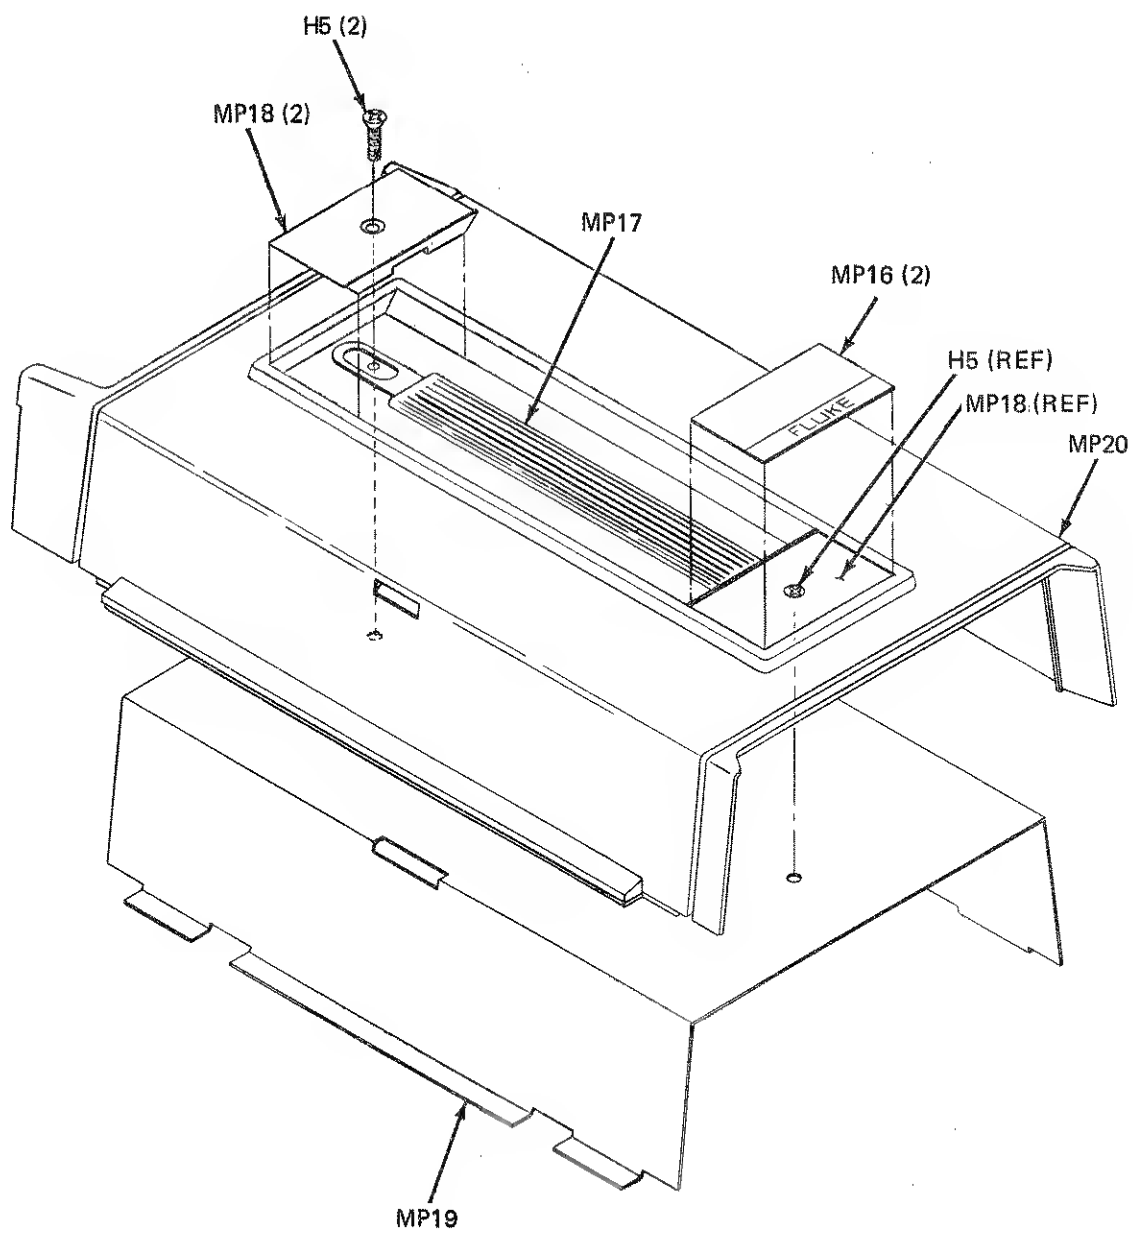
Final Assembly, 2180A Digital Thermometer
